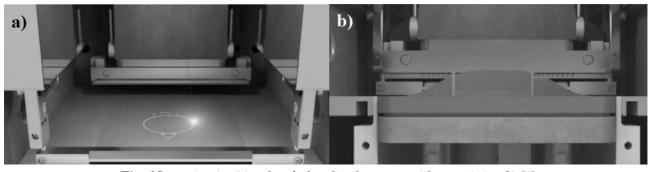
Laser sintering (a) and motherboard in the top area with part printing (b) [4]
